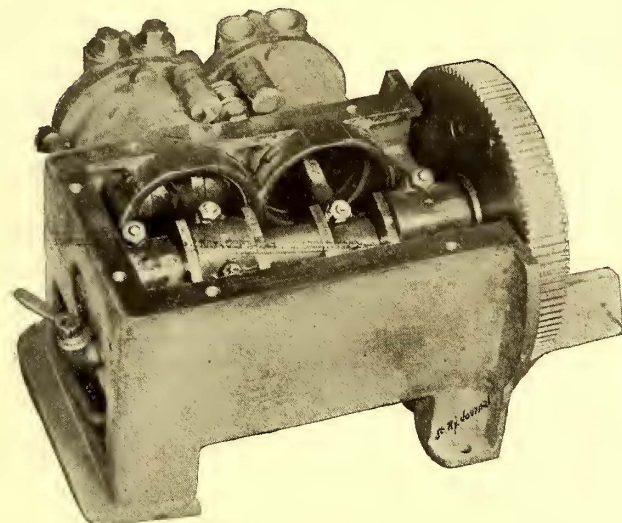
COMPRESSOR WITH MOTOR REMOVED
